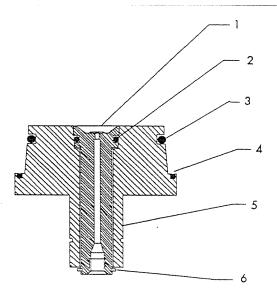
40 mm Lower Connector Assembly (P/N EAT033943)
